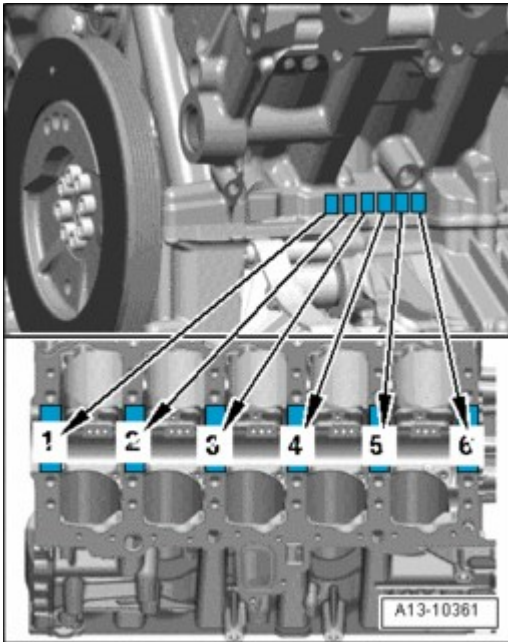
Allocation Of Crankshaft Bearing Shells For Cylinder Block
